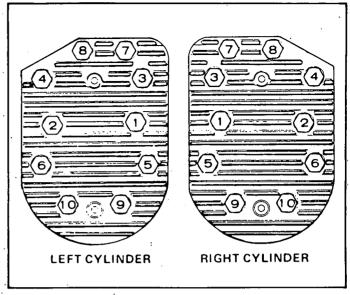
HEAD BOLT TIGHTENING SEQUENCE
